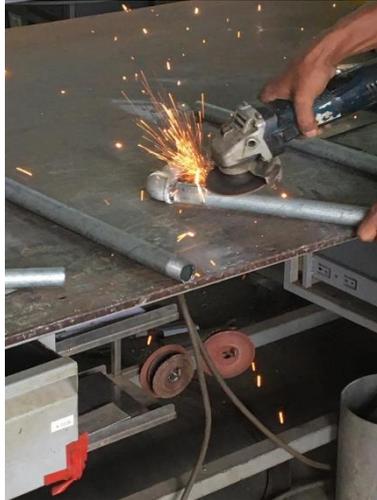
(b): Grinding and resurfacing process to make sure that the surfaces are ready for the welding process.
